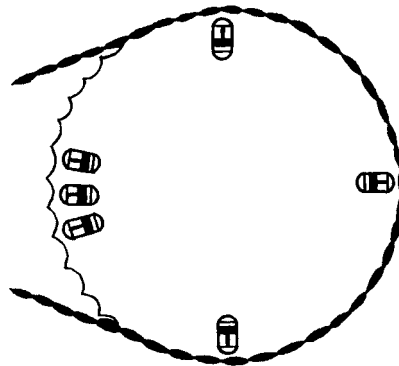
Placement of stabilizing rollers beneath master sprocket.
